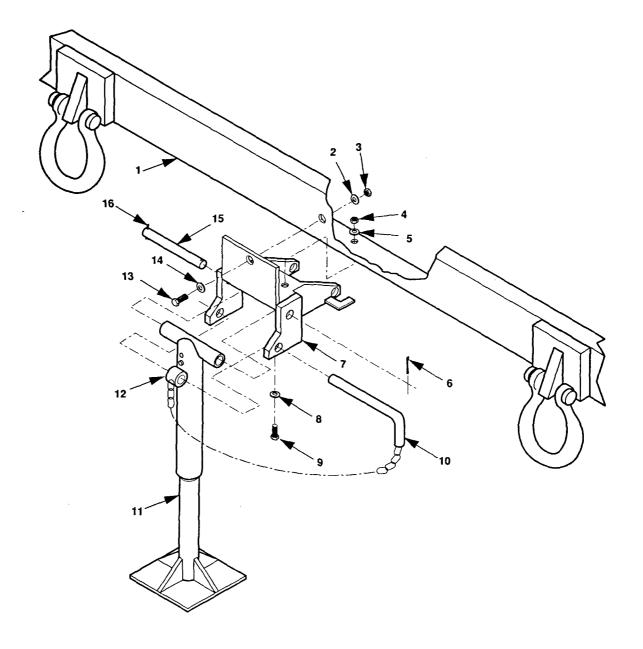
Rear Leveling-Support Jack Replacement; 1 Ton Trailer.
